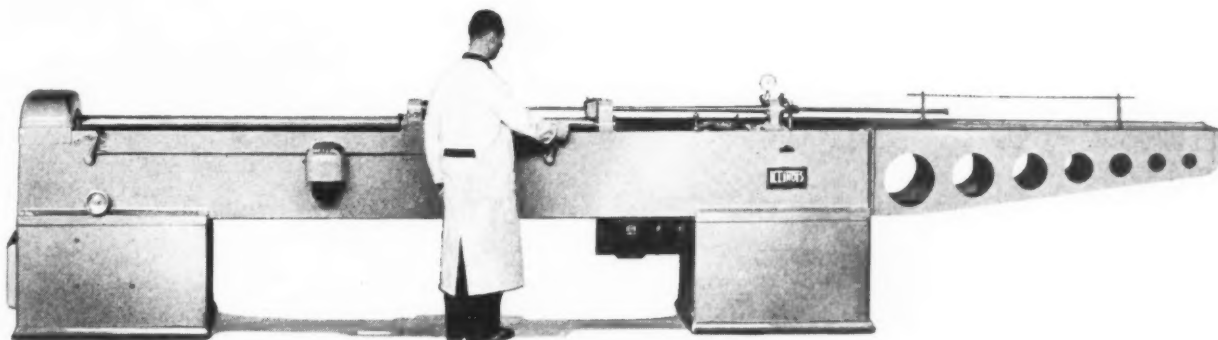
Screw Type Broaching Machine Made by the Illinois Tool Works for Rifling Gun Barrels
